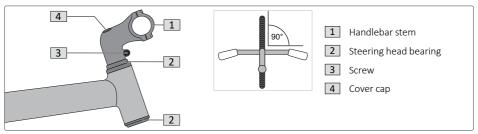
Adjusting the handlebar stem (clamp with clamp screw)
